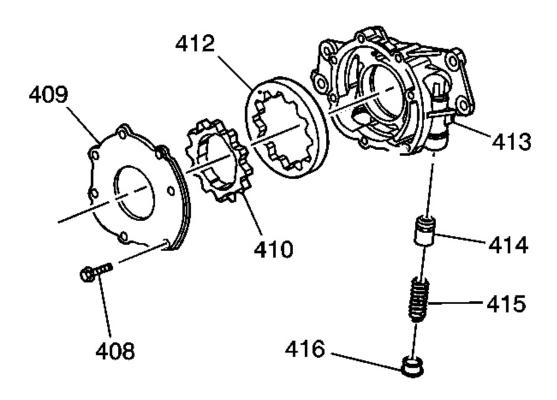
Exploded View Of Oil Pump Courtesy of GENERAL MOTORS CORP.
